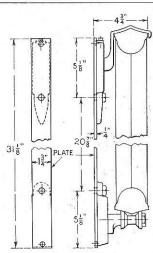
Arco Adjustable Wall Bracket, No. 3 Single. For 9-B Sections of American Peerless Wall Radiators.
